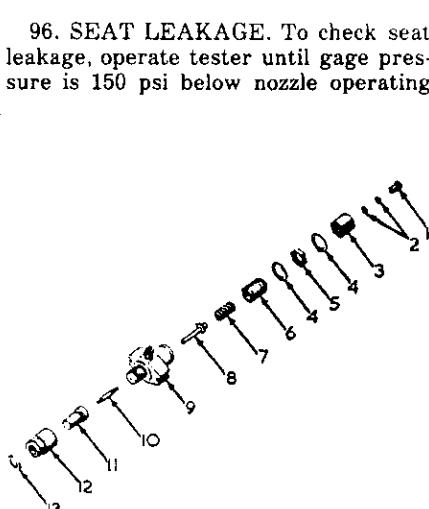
Exploded view of injector nozzle and holder. Refer to Fig. 53 for a cross-sectional view.
